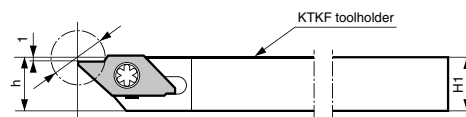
When a TKF-AS/-ASR insert is attached (The cutting edge is 1mm lower than the center line.)
